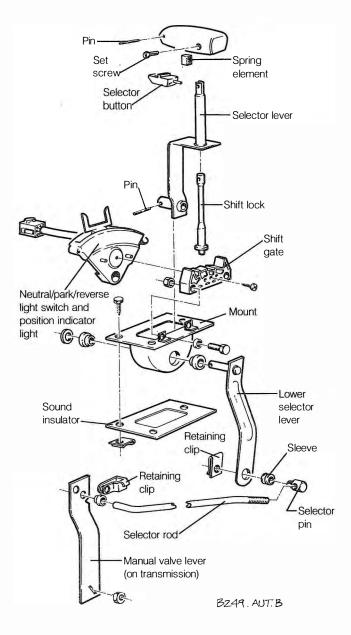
Exploded view of automatic transmission selector lever and linkage.
